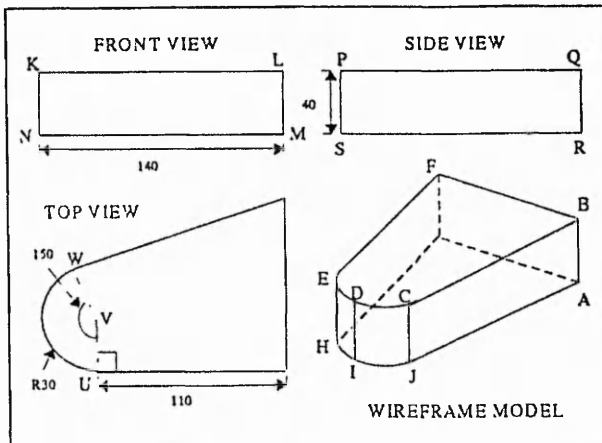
An example of a drawing with various linear, radial and angular dimensions. The drawing from Figure 4 is now complete with all dimensions shown. The linear dimension "140" is associated with pairs of nodes K and L, N and M respectively. The radial dimension "30" is associated with the nodes U and W with V as the centre node. The angular dimension "150" is also associated with U, W and V as the centre node. Then, once the position of vertex A is fixed, the position of all other vertices B-J can be found.
